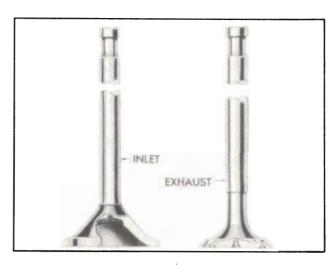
Inlet and Exhaust Valves—Sectional View
